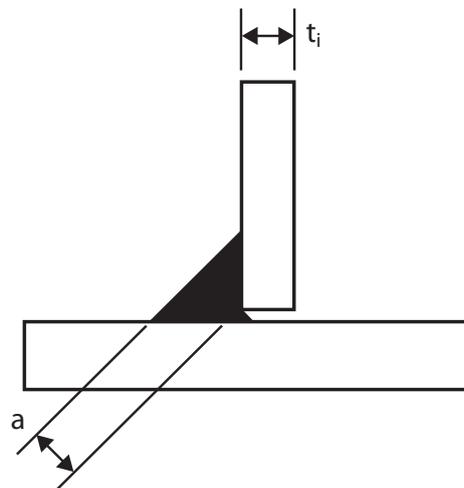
Pre-qualified Weld Throat Thickness
